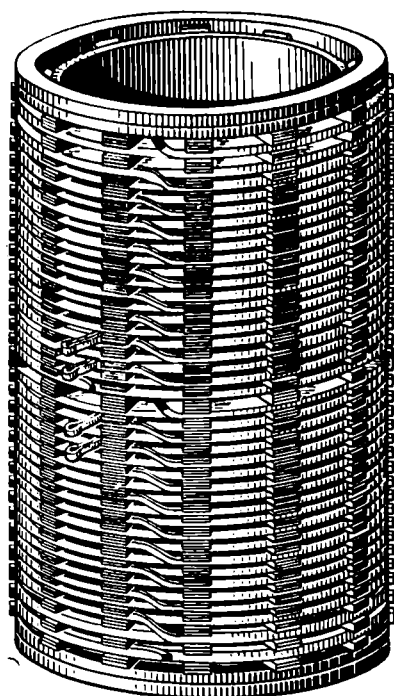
Continuous disc HV winding with regulating taps (centre-tapped winding) and enlarged duct
